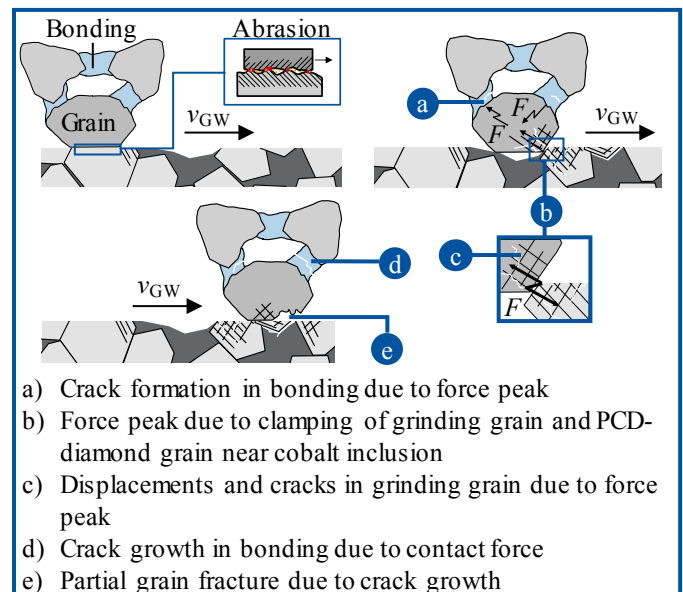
Explanatory model for grinding wheel wear mechanisms during PCD grinding
